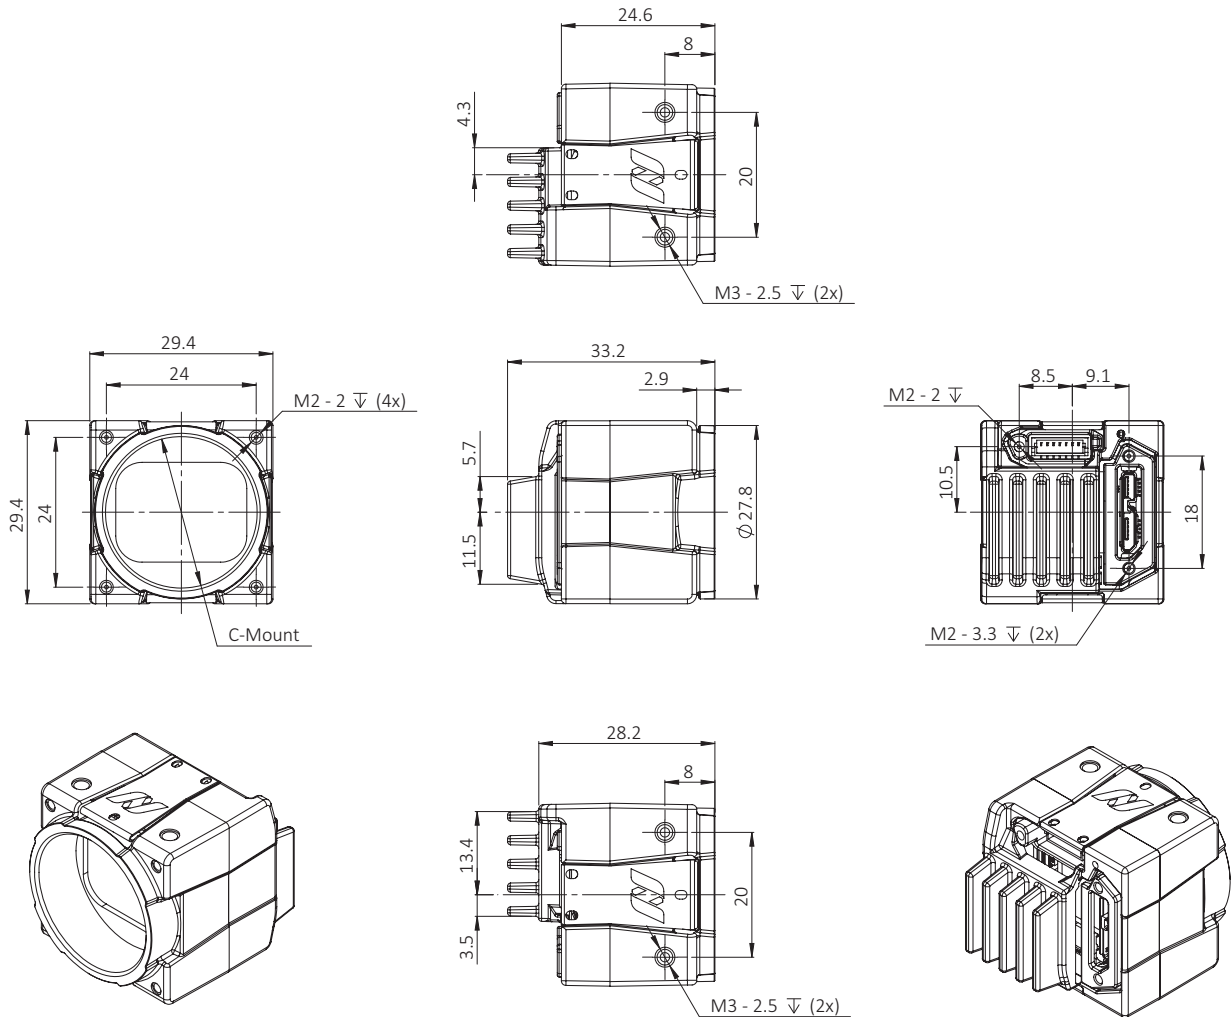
Dimensions for USB 180° closed housing CS-Mount
